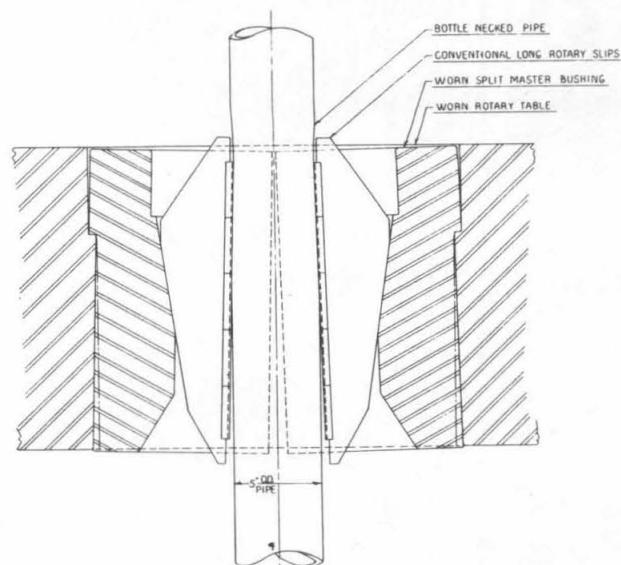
Cross section of API rotary slips set on 5-in-OD drill pipe in a standard split master bushing indicating wear
